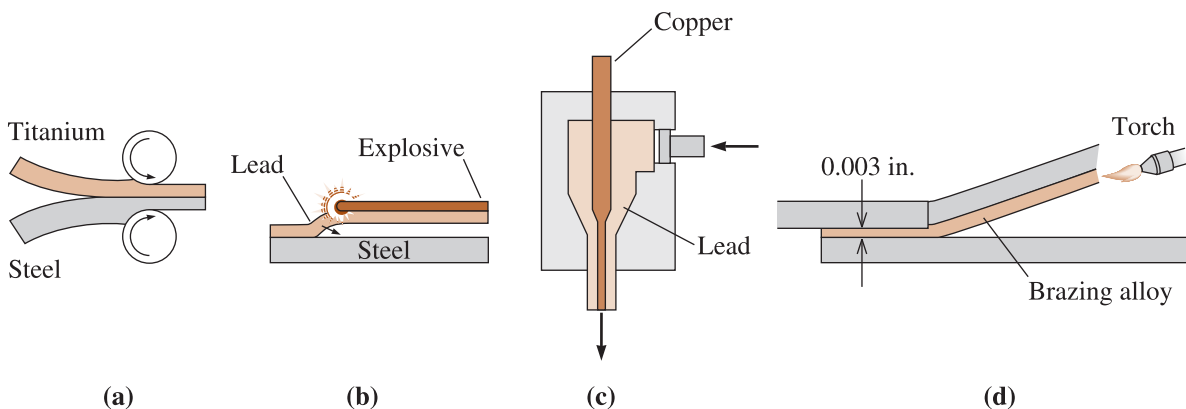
Techniques for producing laminar composites: (a) roll bonding, (b) explosive bonding, (c) coextrusion, and (d) brazing.
